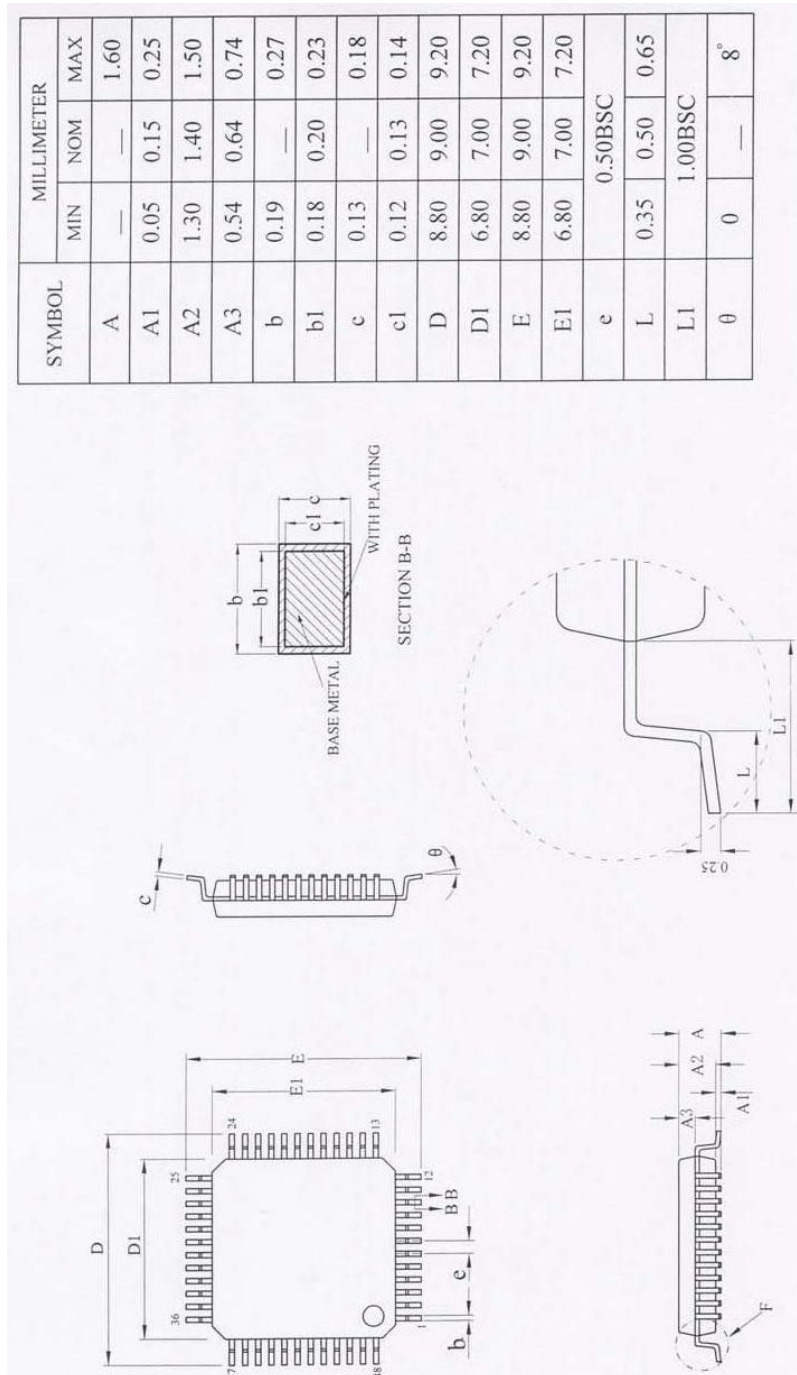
LQFP48-7x7mm Package Dimension Parameter
